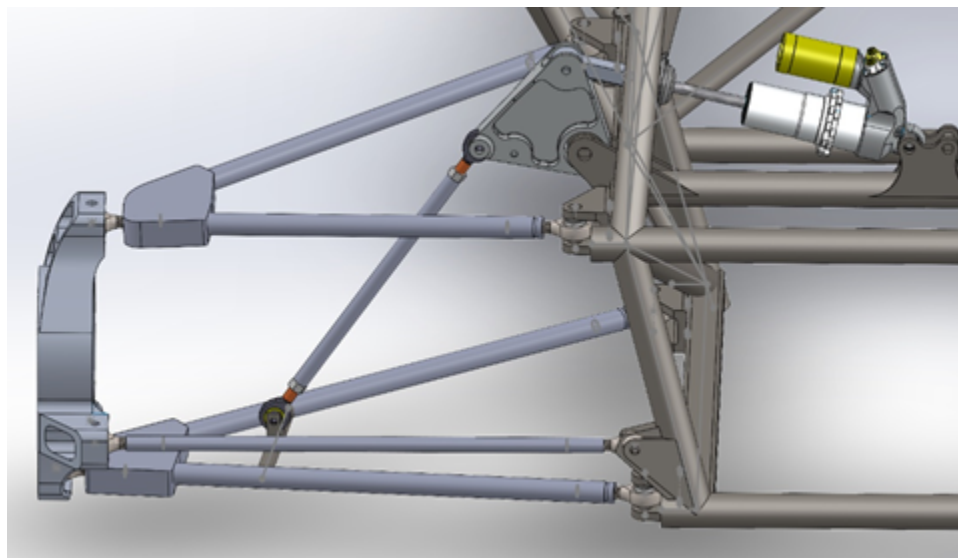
Rear pushrod rocker assembly with lower control arm pushrod mounting
